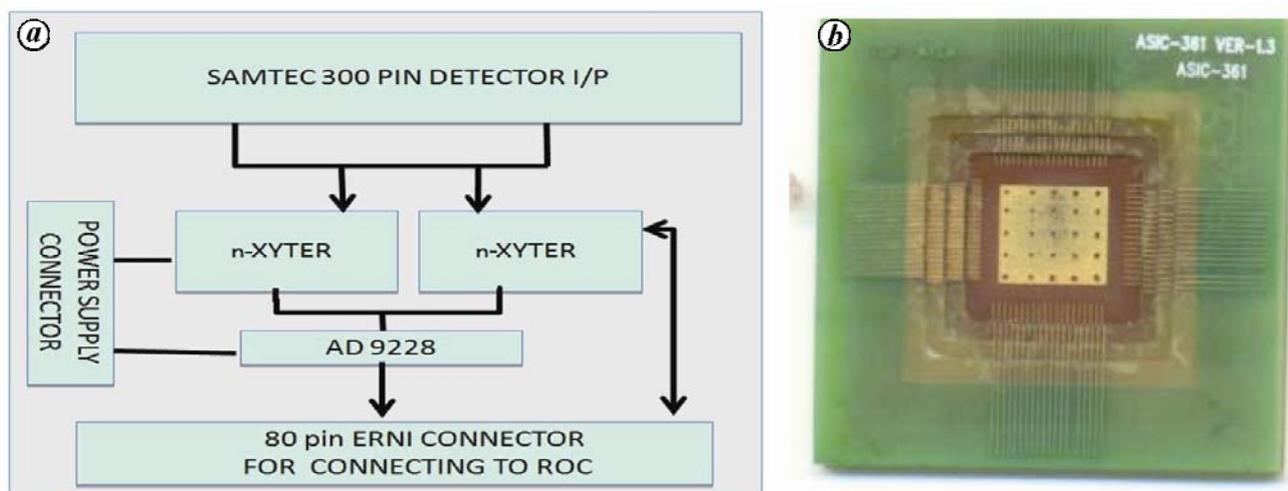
(a) Design of a FEB; and (b) a PCB scooped for mounting a bare ASIC by wire bonding.
